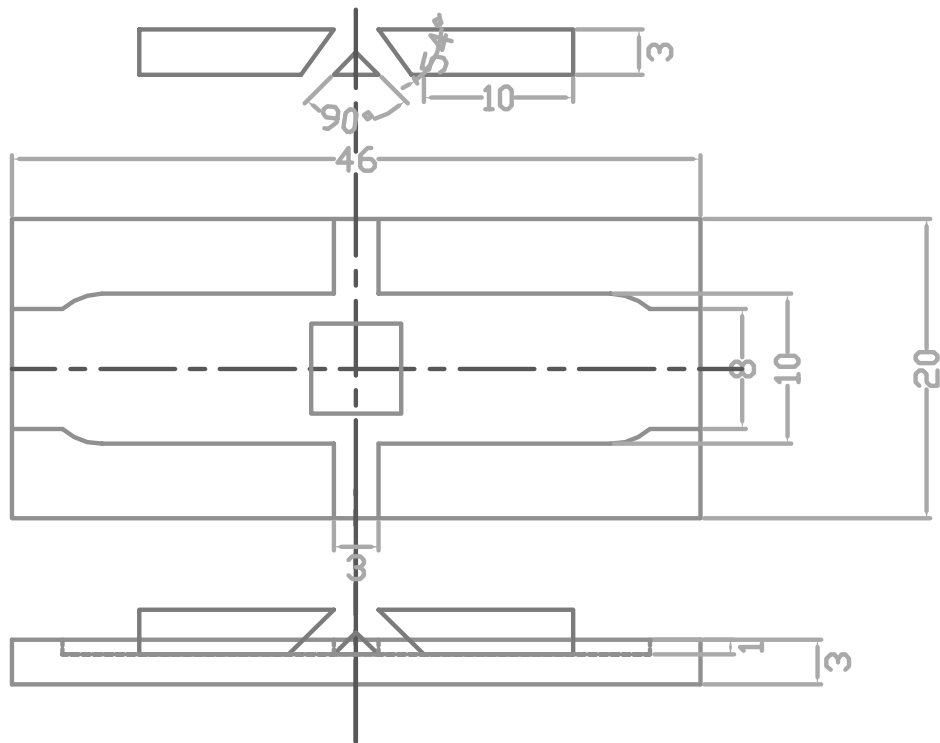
CAD drawing of the prism holder that was used in the second stereoscopic viewing configuration. The substrate material was aluminium. Dimensions are in mm.
